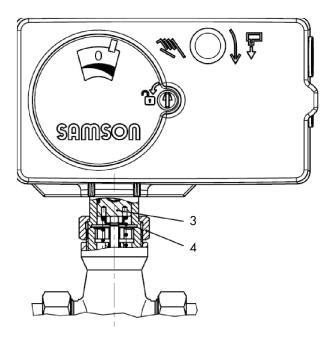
Force-locking attachment with coupling nut, e.g. to Type 3222 Valve
